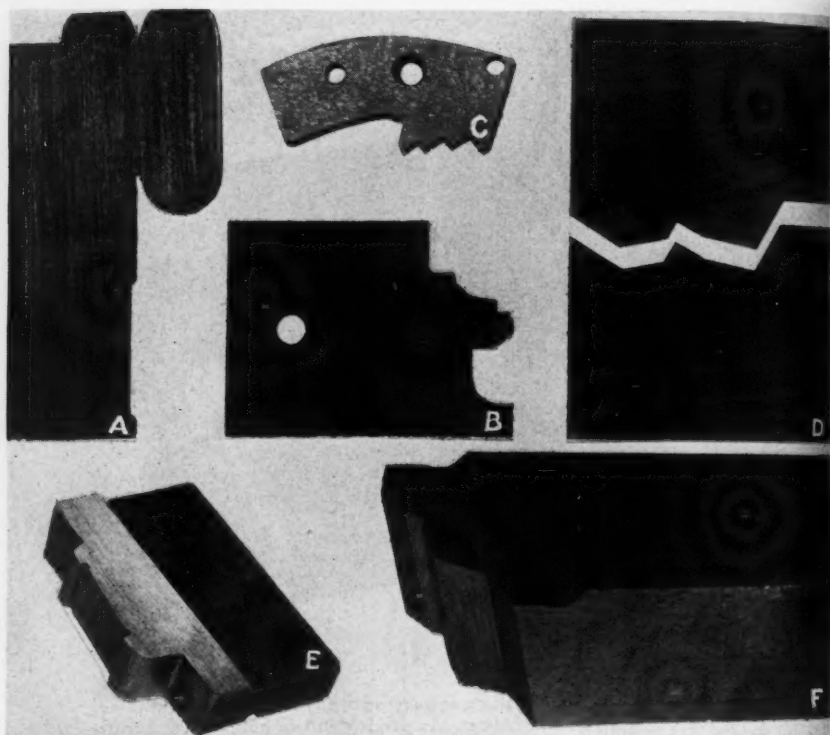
(A) Inspection gage for ball bearing rings. Grinding time,  $6\frac{1}{2}$  hrs. (B) Gage for typewriter part. Grinding time,  $4\frac{1}{2}$  hrs. (C) Part for calculating machine. Time, 3 hrs. (D) Gage with corresponding gage for a relieved part with constant profile. Time,  $5\frac{1}{2}$  hrs. (E) Relieved scraping tool with constant profile for making profile tools for internal rings of conical roller bearings. Time, 6 hrs. (F) Half-size reproduction of relieved turning tool with constant profile. Time, 4 hrs.
